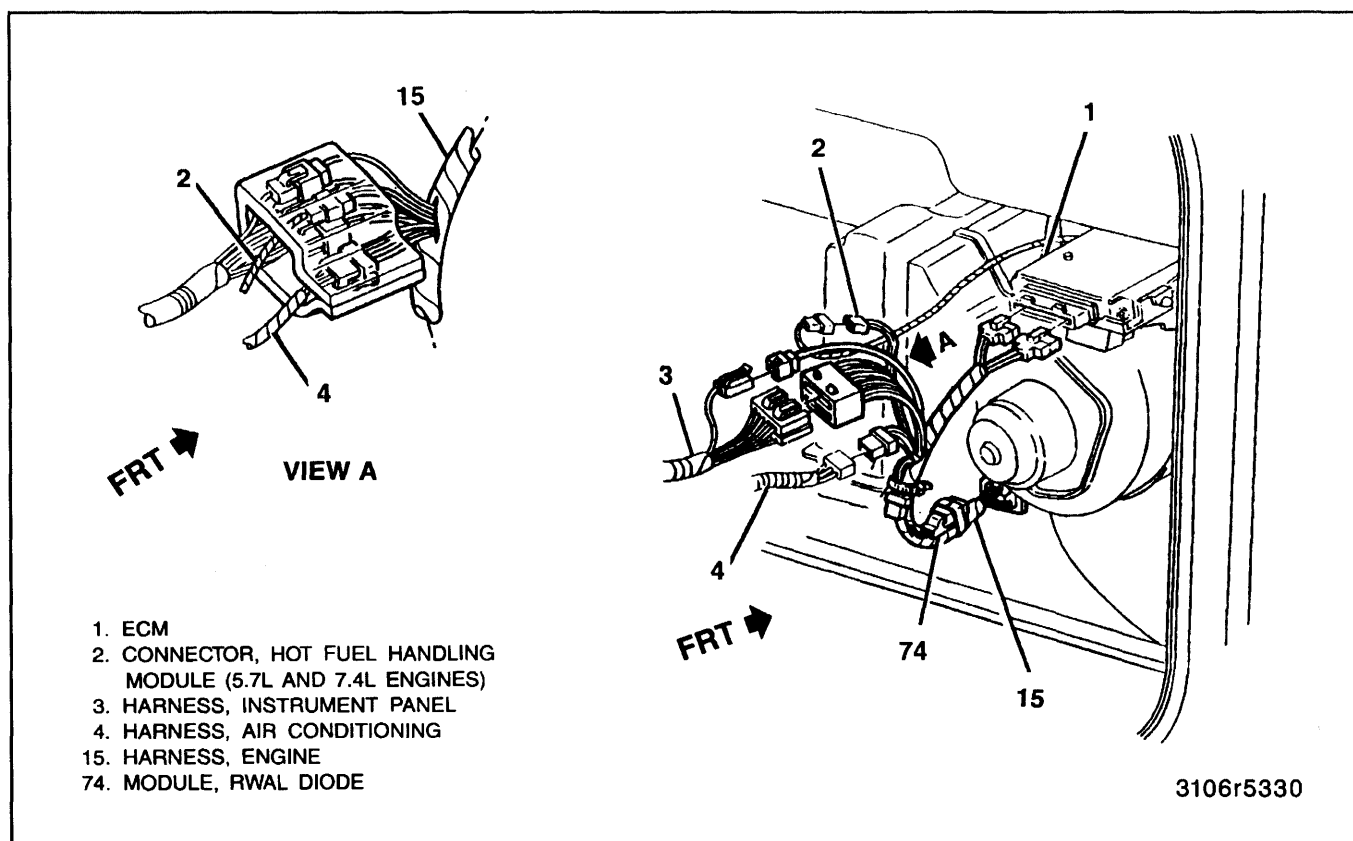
Engine Wiring to the Control Module (Gas Engines)
